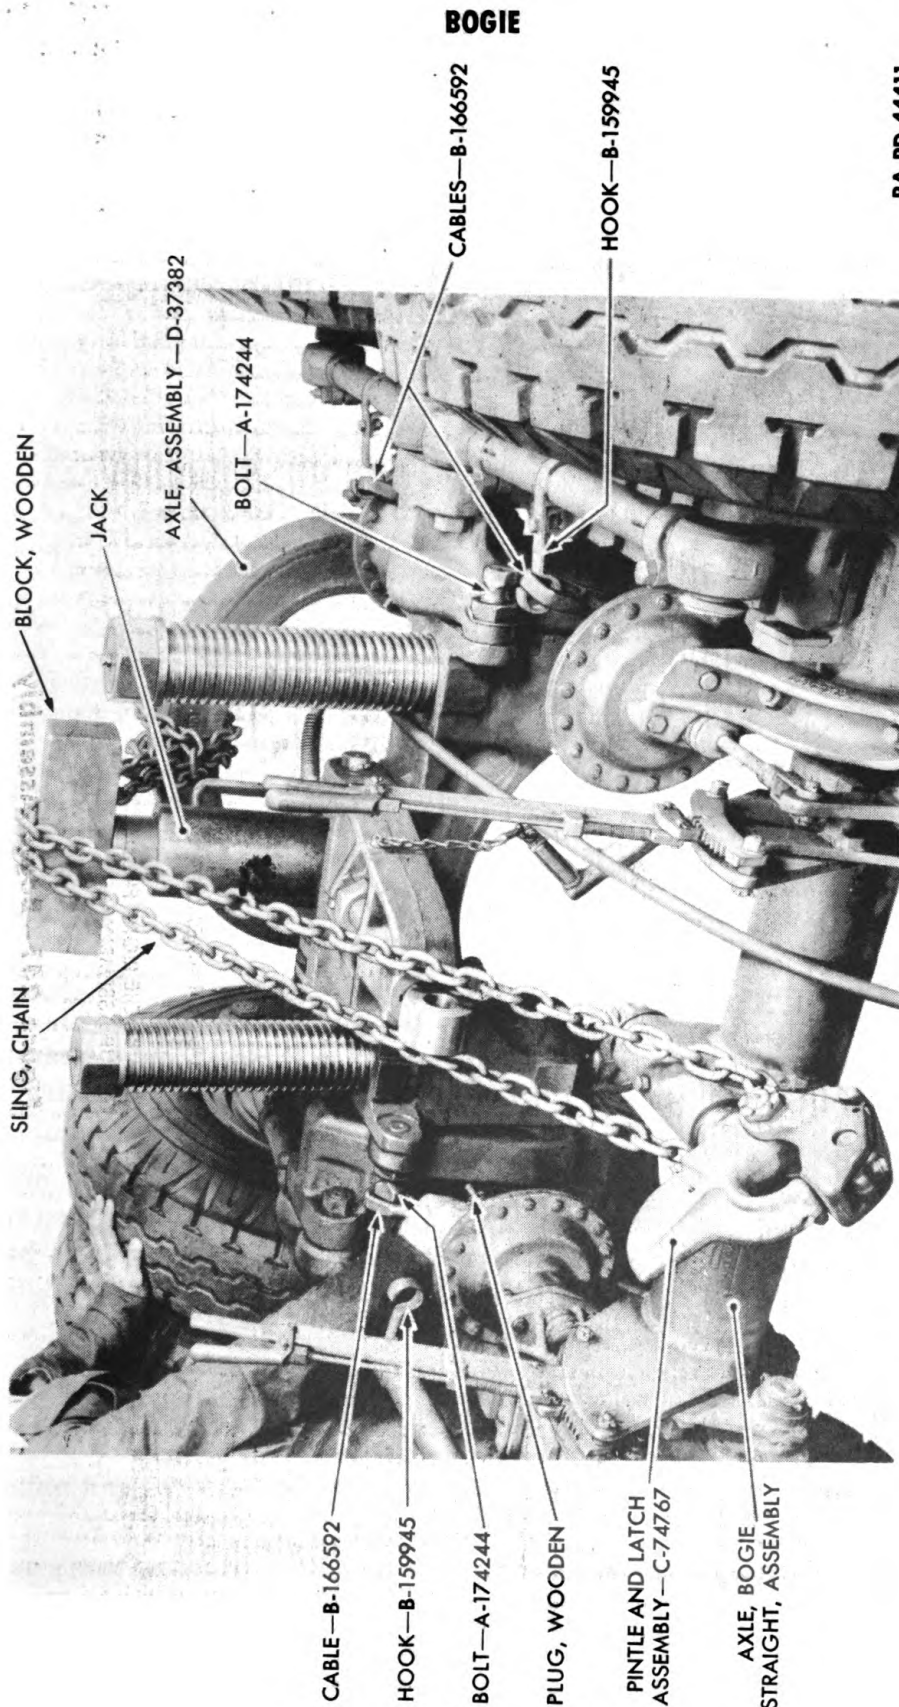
Removing Wheel Supporting Cable—Bogie Off Carriage
